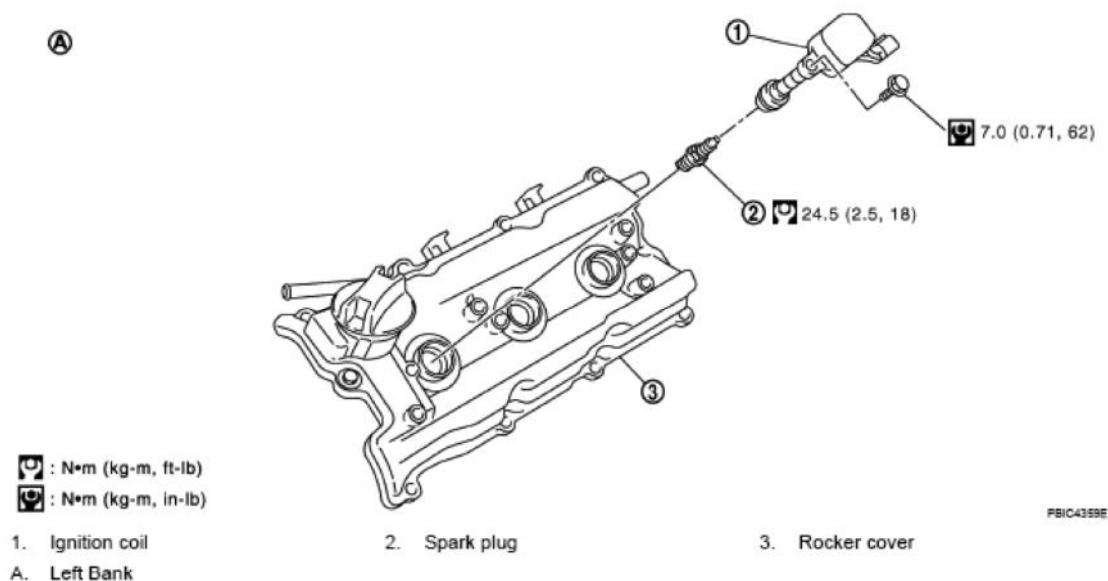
Identifying Spark Plug (Platinum-Tipped Type) Components With Torque Specifications
